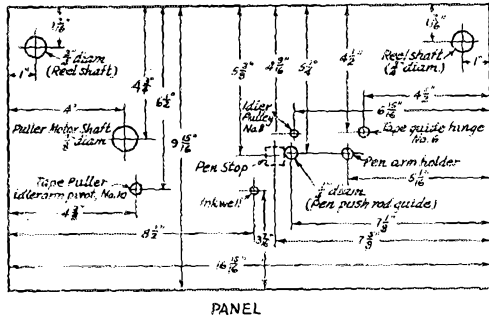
Panel layout, showing location of important hole centers. The panel in the original is $\frac{1}{8}$ -inch steel.
